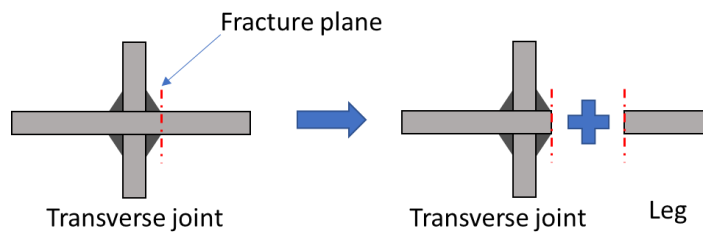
Schematic of the specimen being broken at the fracture plane to get two fracture surfaces - the transverse joint and the leg.
